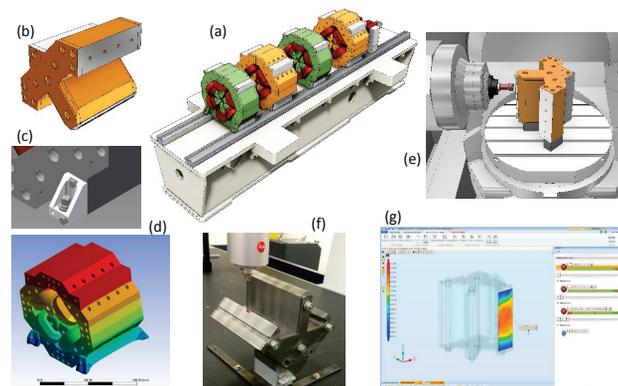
Proposed girder-magnet assembly for Sirius showing: (a) the girder with multipole magnets; (b) one pole of the quadrupole magnet with machine reference surfaces; (c) the designed clamping fixture; (d) structural analysis of the clamping fixture (>400 Hz vibration mode); (e) machining process developed for the quadrupole; (f) machined pole on CMM machine; and (g) results for the surface flatness measurements (< 8 μm).
